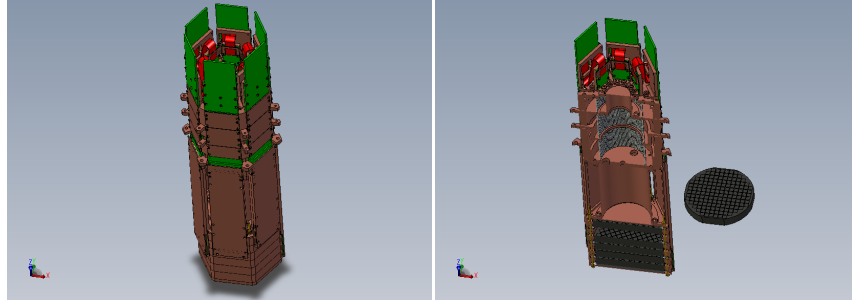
CAD rendering of a fully assembled detector stack: detectors, towers, and SQUETS. At right is a cross-sectional view, with one ZIP removed. Courtesy: Patrick Wikus.
